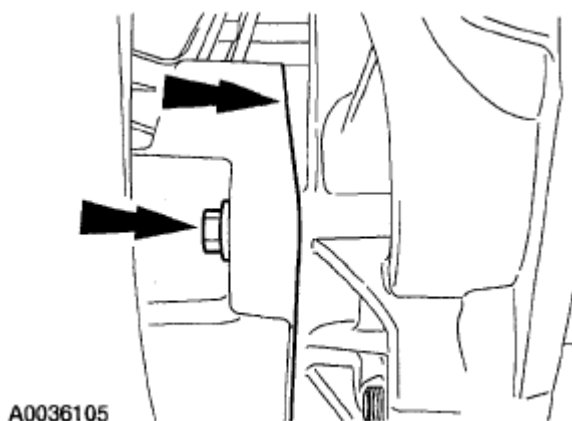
Locating Power Transfer Unit (PTU) And Bolt
